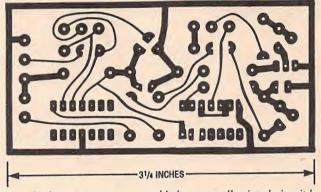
The author's prototype was assembled on a small printed-circuit board that measures about 31/4 by 19/16 inches. A full-size template of that printed-circuit pattern is shown here.
